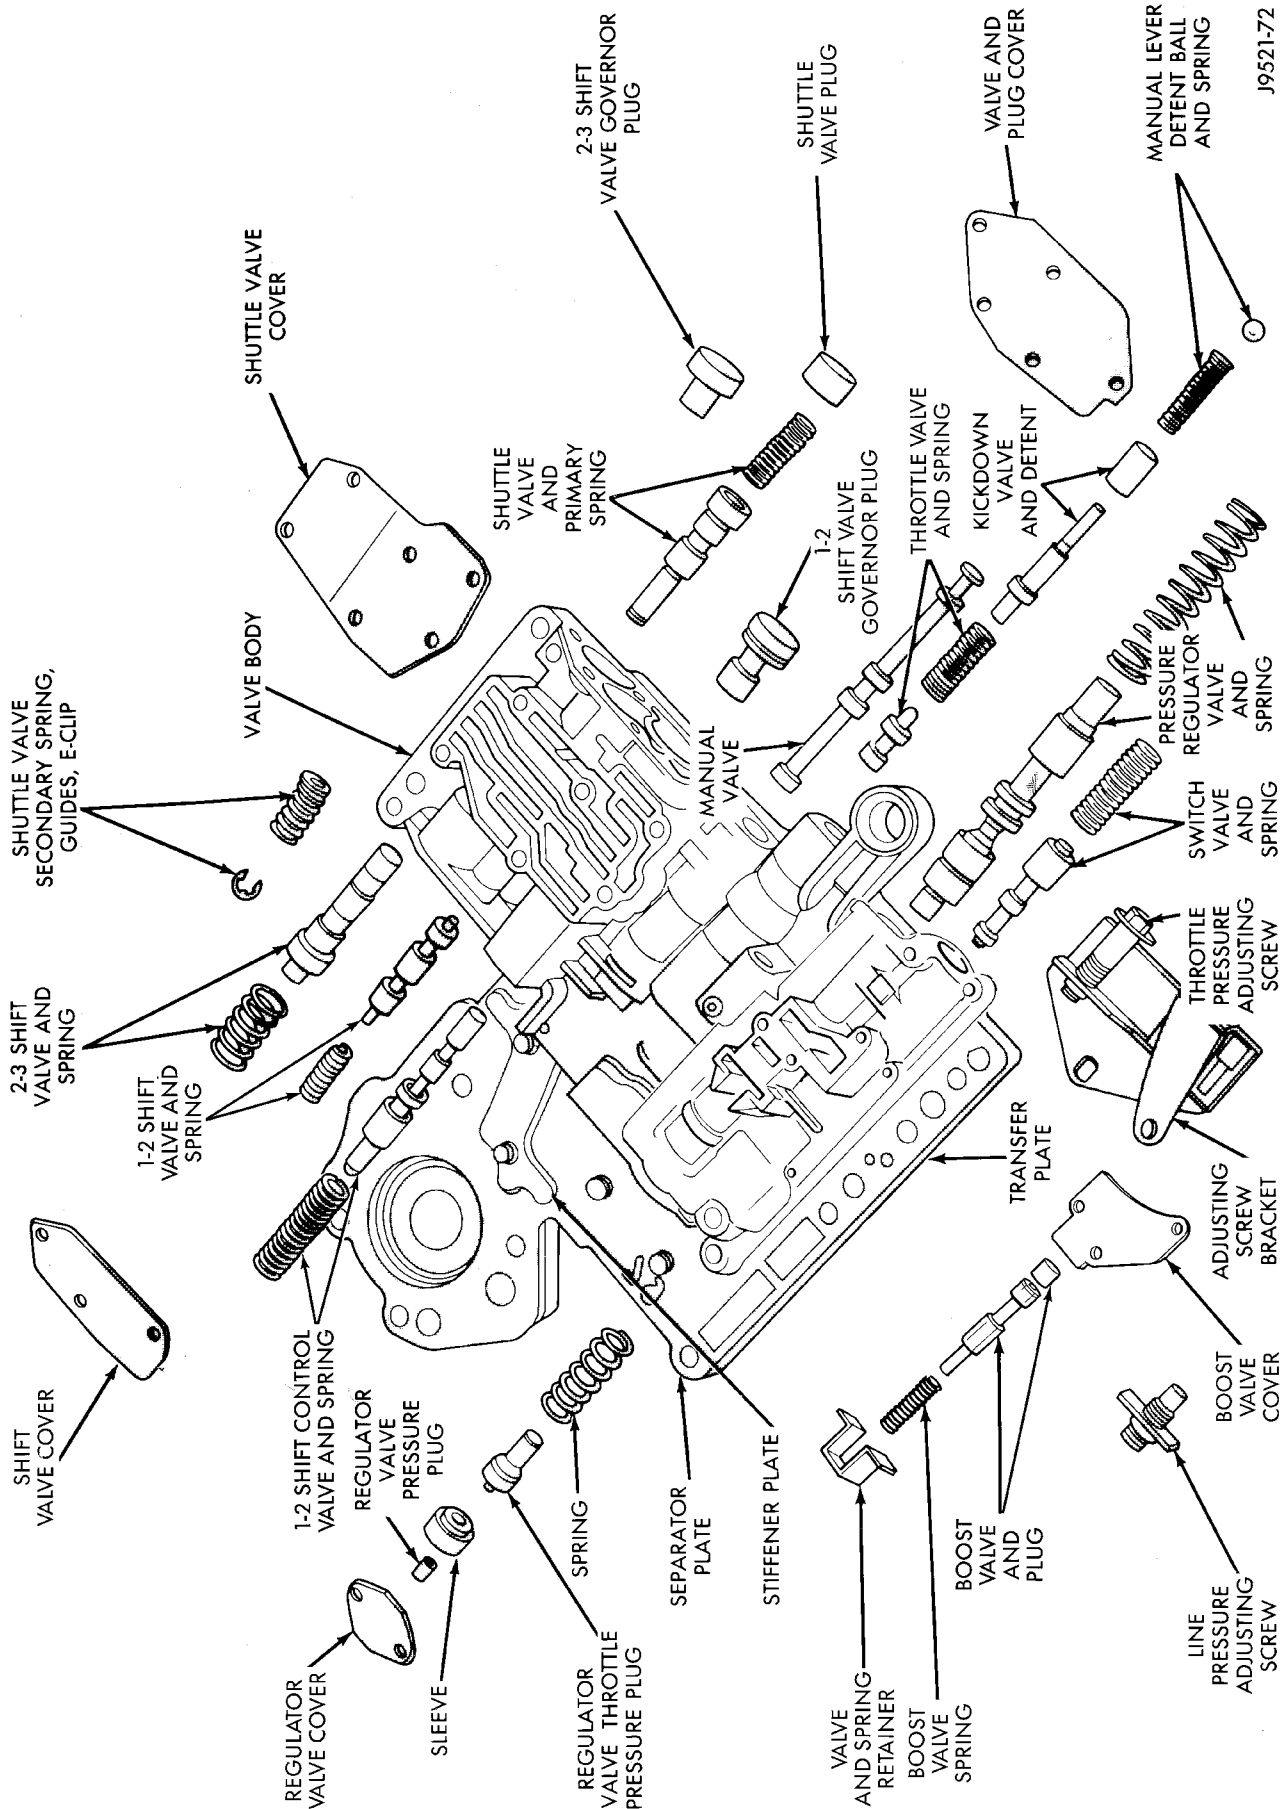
Upper Housing Valves, Plug, Springs And Brackets
